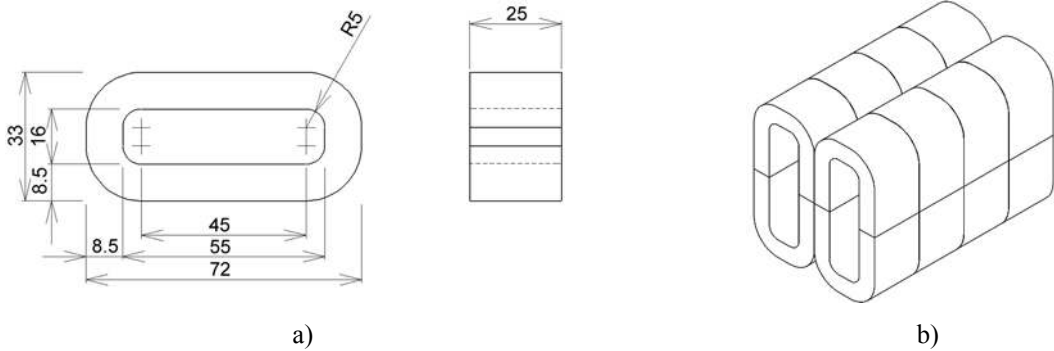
Transformer core; a) single core dimensions, b) assembly of 8 cores
